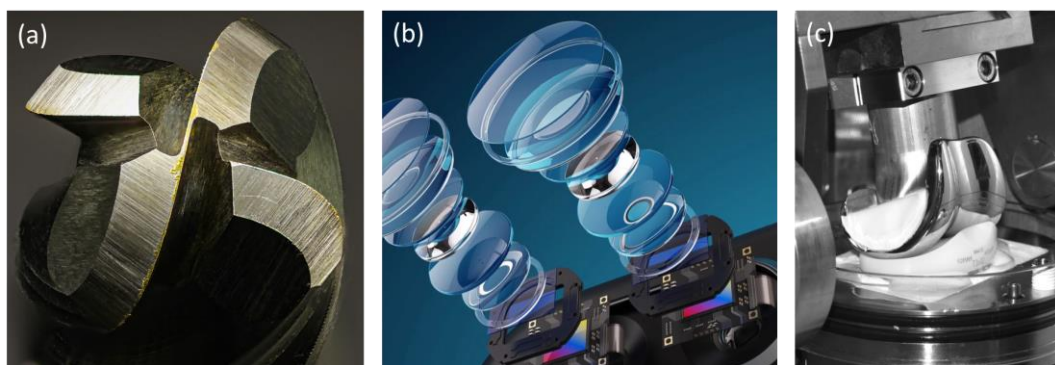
(a) A milling cutter tool, (b) exploded-view of aspherical microlens arrays found in smart phone cameras, and (c) total knee replacement part mounted in a wear simulator from [17]. Copyright: (a) “[10 mm Ball End Milling Cutter](https://flic.kr/p/2jgLF5m)” (<https://flic.kr/p/2jgLF5m>) by Tudor Barker under a [CC BY-NC-SA 2.0](https://creativecommons.org/licenses/by-nc-sa/2.0/) license. (b) Used with permission from ZYGO Corporation (AMETEK). (c) Reproduced from [17] with permission from Prof. Philippe Kretzer and Elsevier via CCC RightsLink publisher request (No. 5310851305781).
